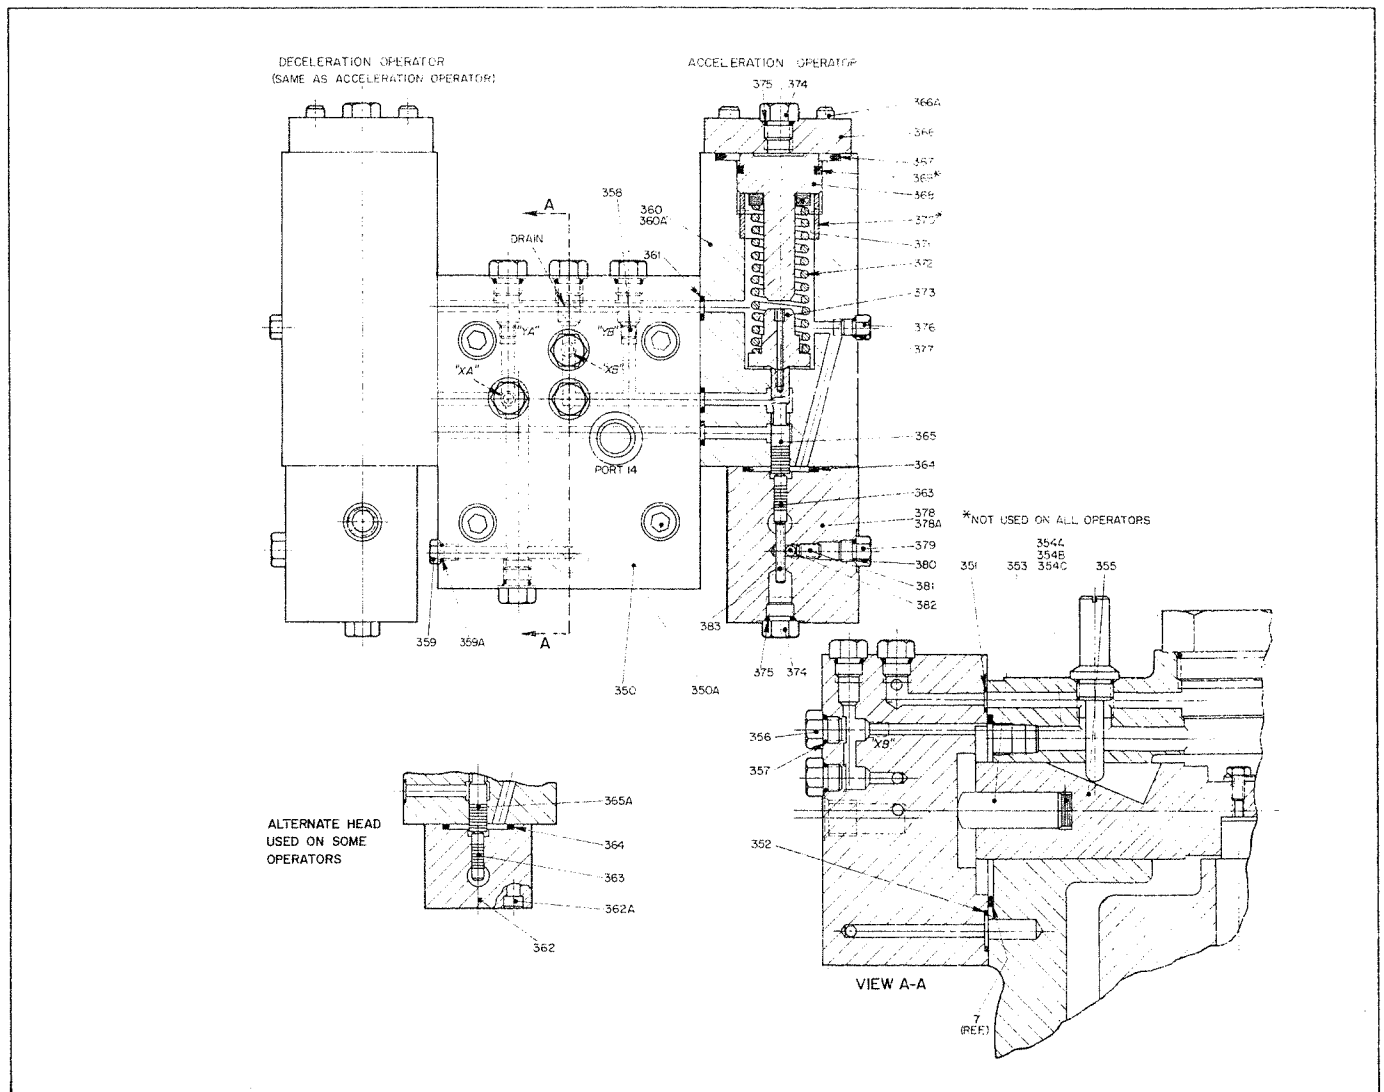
Parts Drawing, Type "C" opposing operator (509805).
